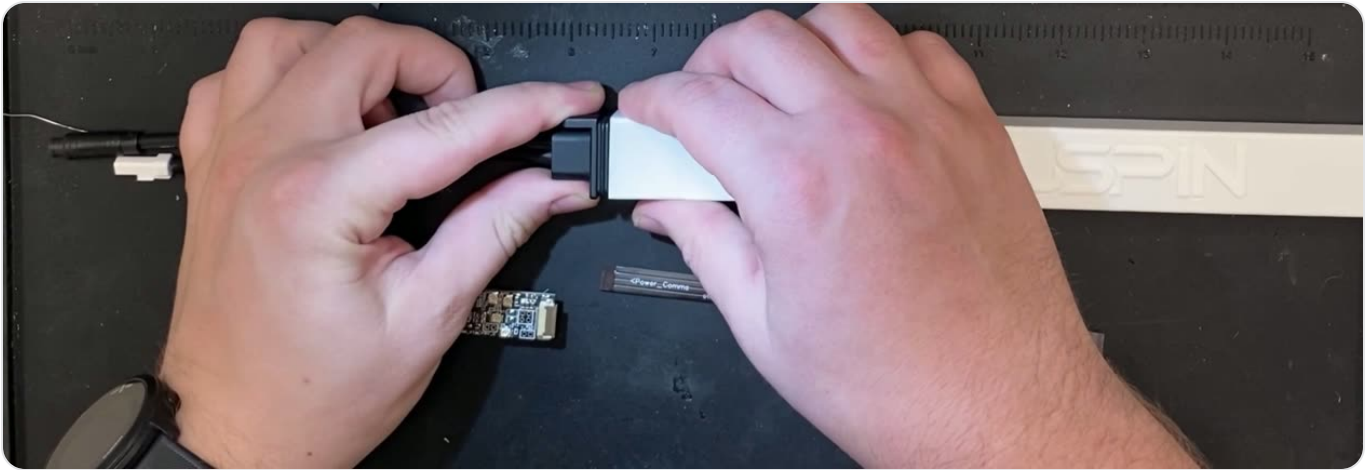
Connecting a standard Comms board (SCB) to the MiniACB flex-cable connector. [Watch in the online guide →](#)
